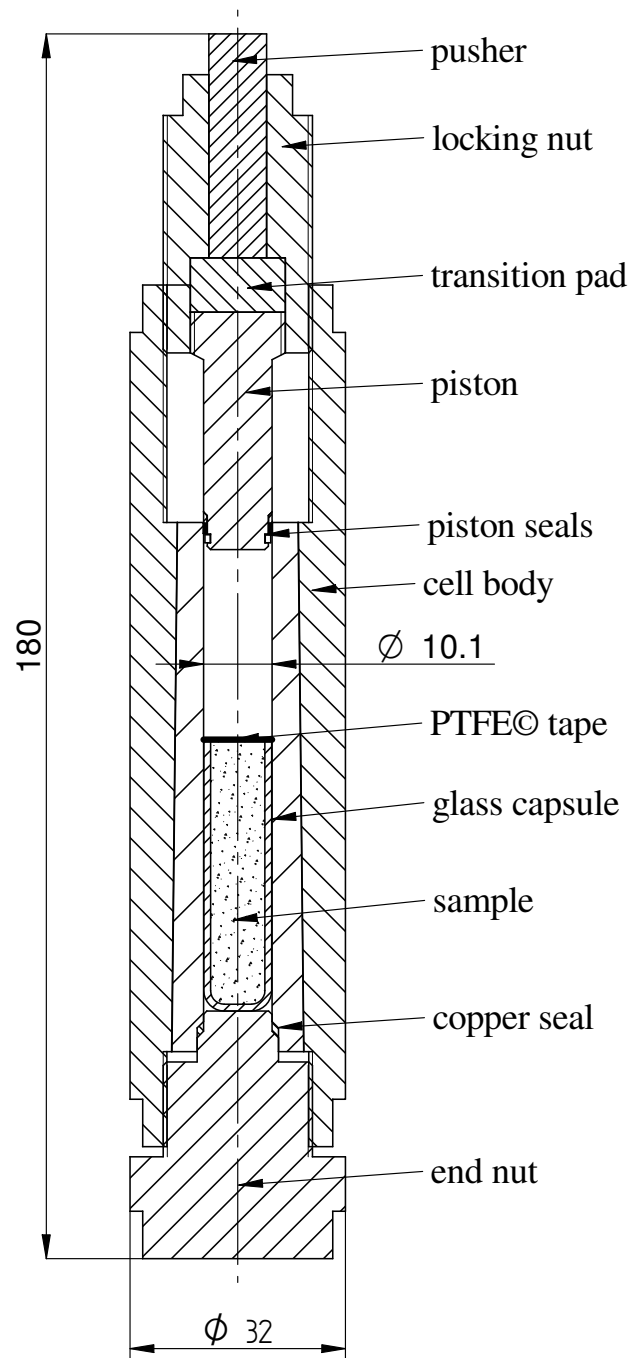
Cross-section of the assembled piston-cylinder cell.
